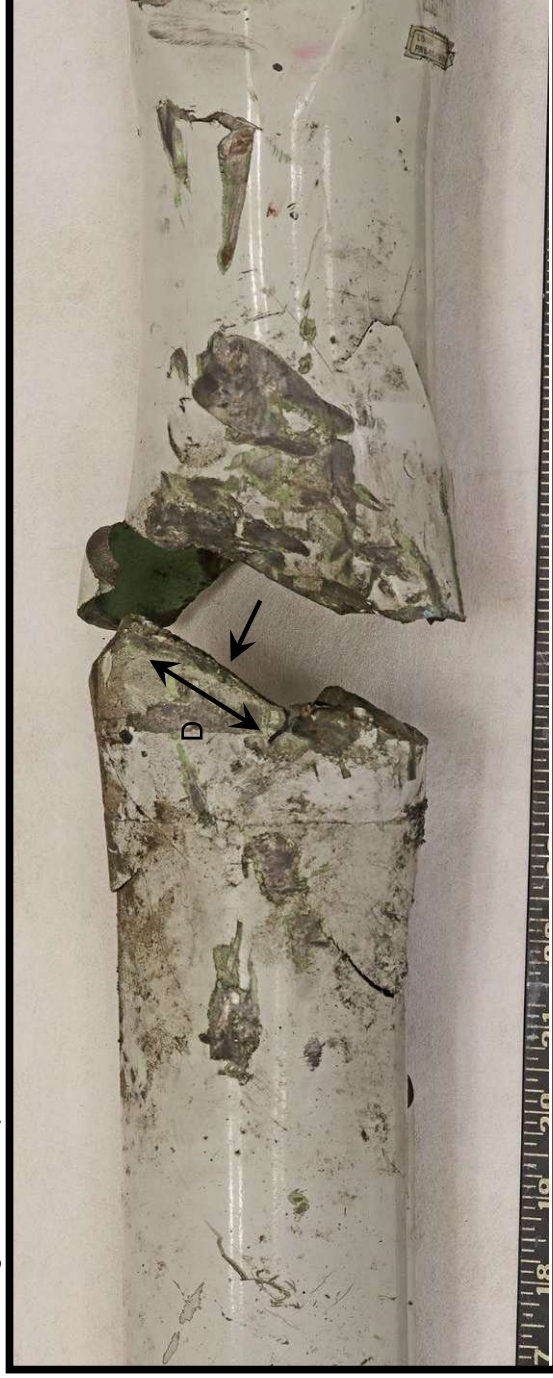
Detailed view of Upper Drag Strut Fractures (FWD Side).
